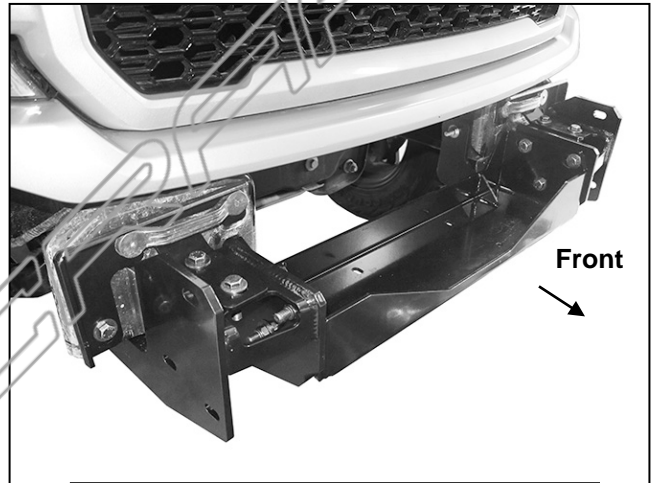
Passenger/right Frame Bracket and Support Bracket installed. Frame Bracket installed. If winch will not be installed, skip Figures 9 & 10
